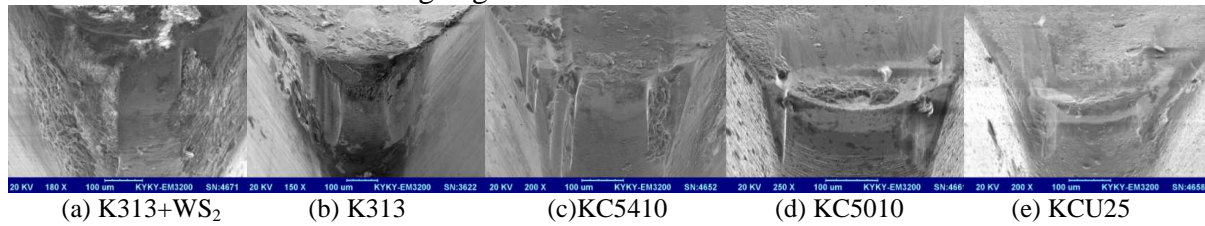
Morphology of tool wear for five different coated tool ($v=300\text{m/min}$)
